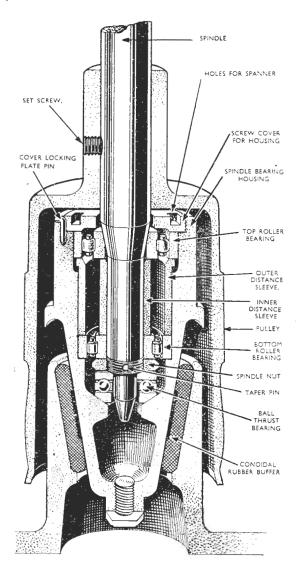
Spindle bearing assembly for 27-in. Watson Laidlaw hydro extractor.
